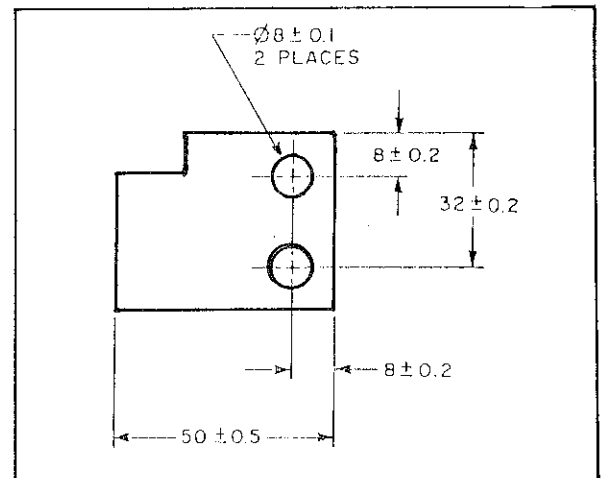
COORDINATE DIMENSIONS AND TOLERANCES
